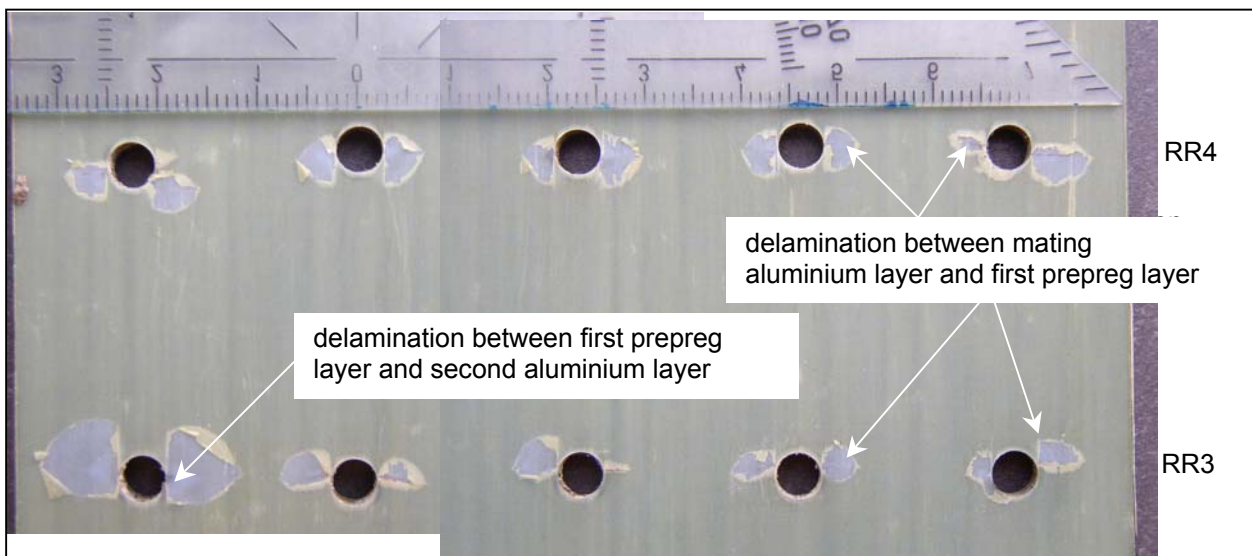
Specimen 2-B-15 after 60000 CA cycles and 40000 flights, view on the delamination shape of the butt strap between mating aluminium layer (removed) and first prepreg layer
